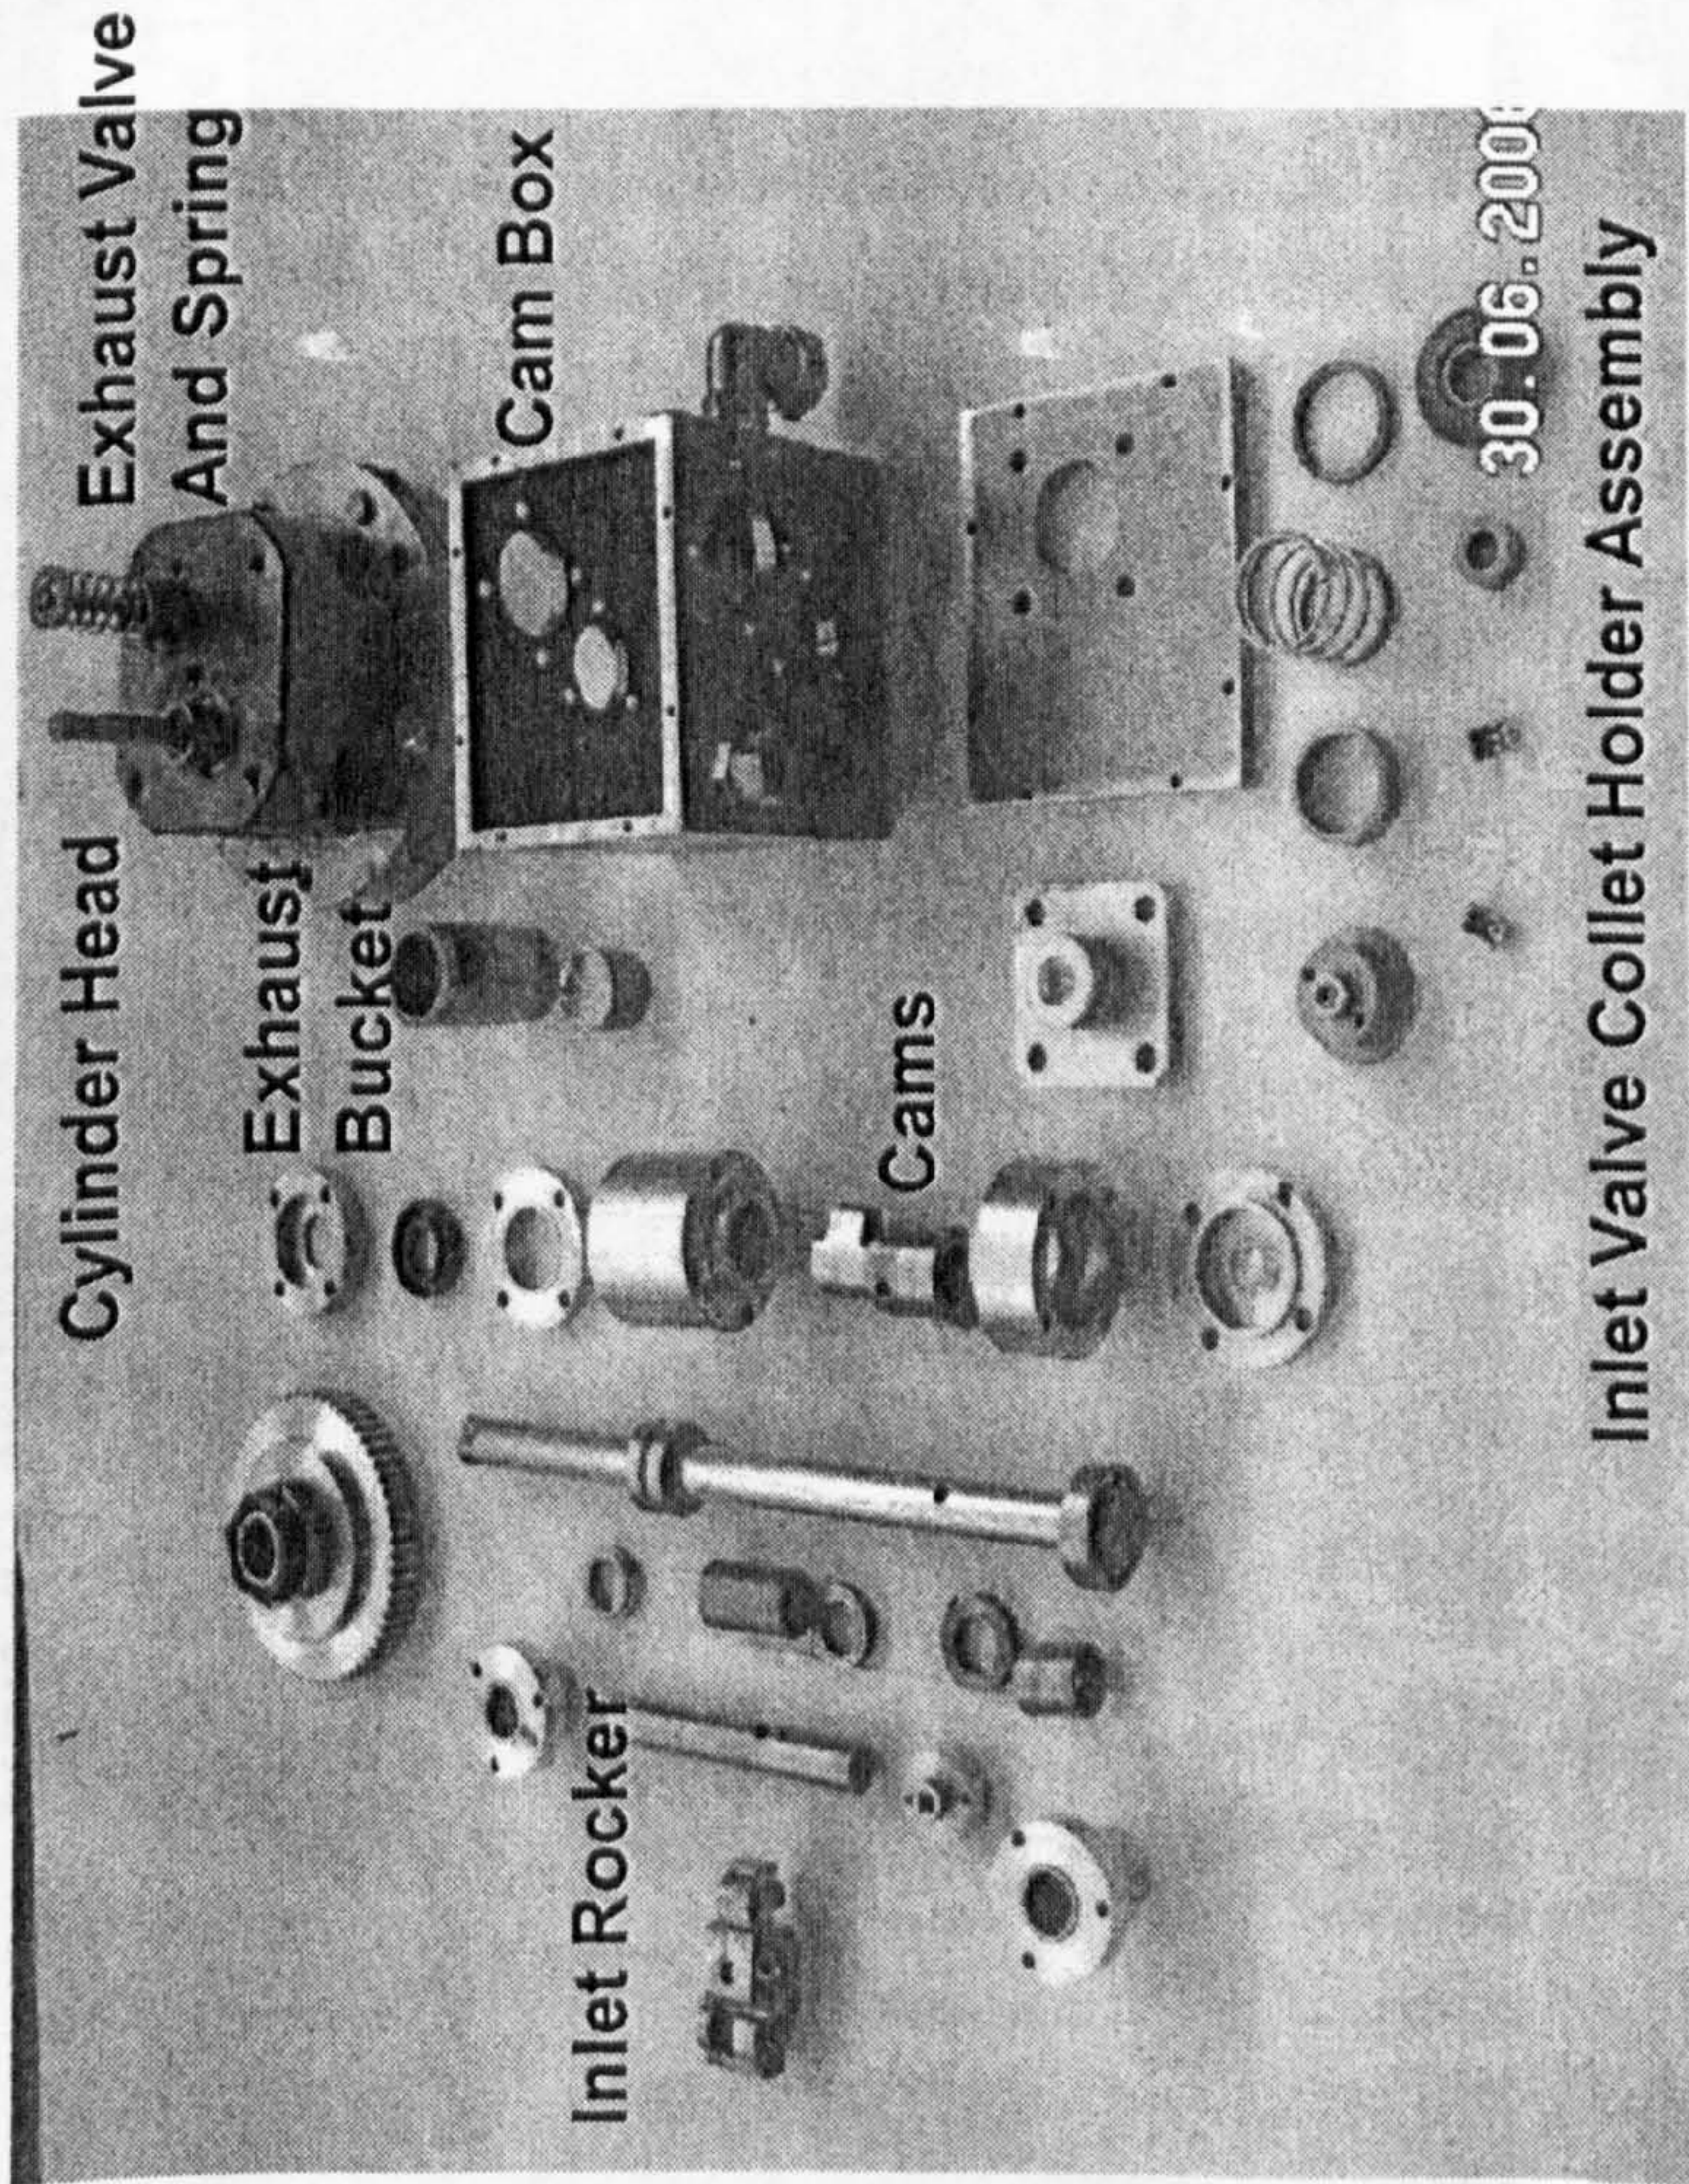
Cylinder Head, Cam Box and Cam Box Components
